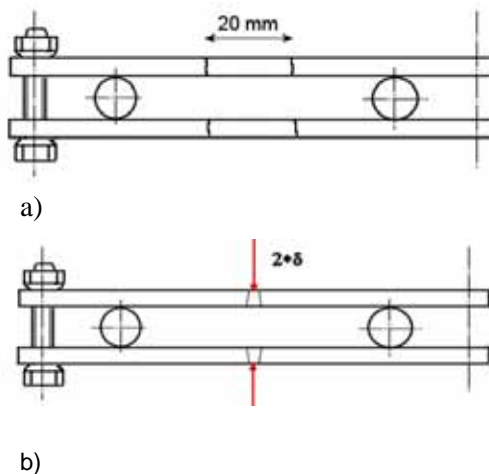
Loading geometry with displacement measurement location indicated by two arrows of (a) pure weld metal and (b) dissimilar weld metal mock-up samples.
